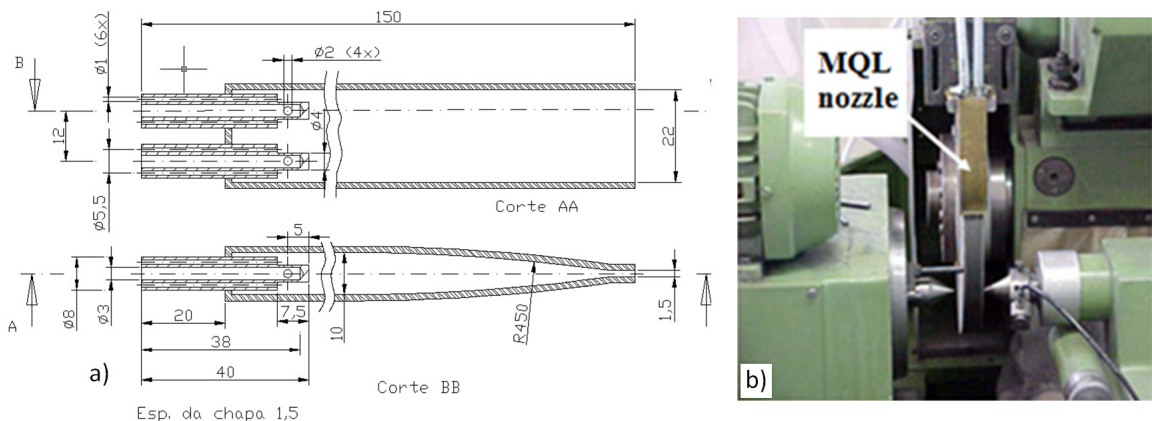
(a) MQL nozzle design (dimensions in mm); (b) Nozzle placement in relation to the wheel²⁴.
